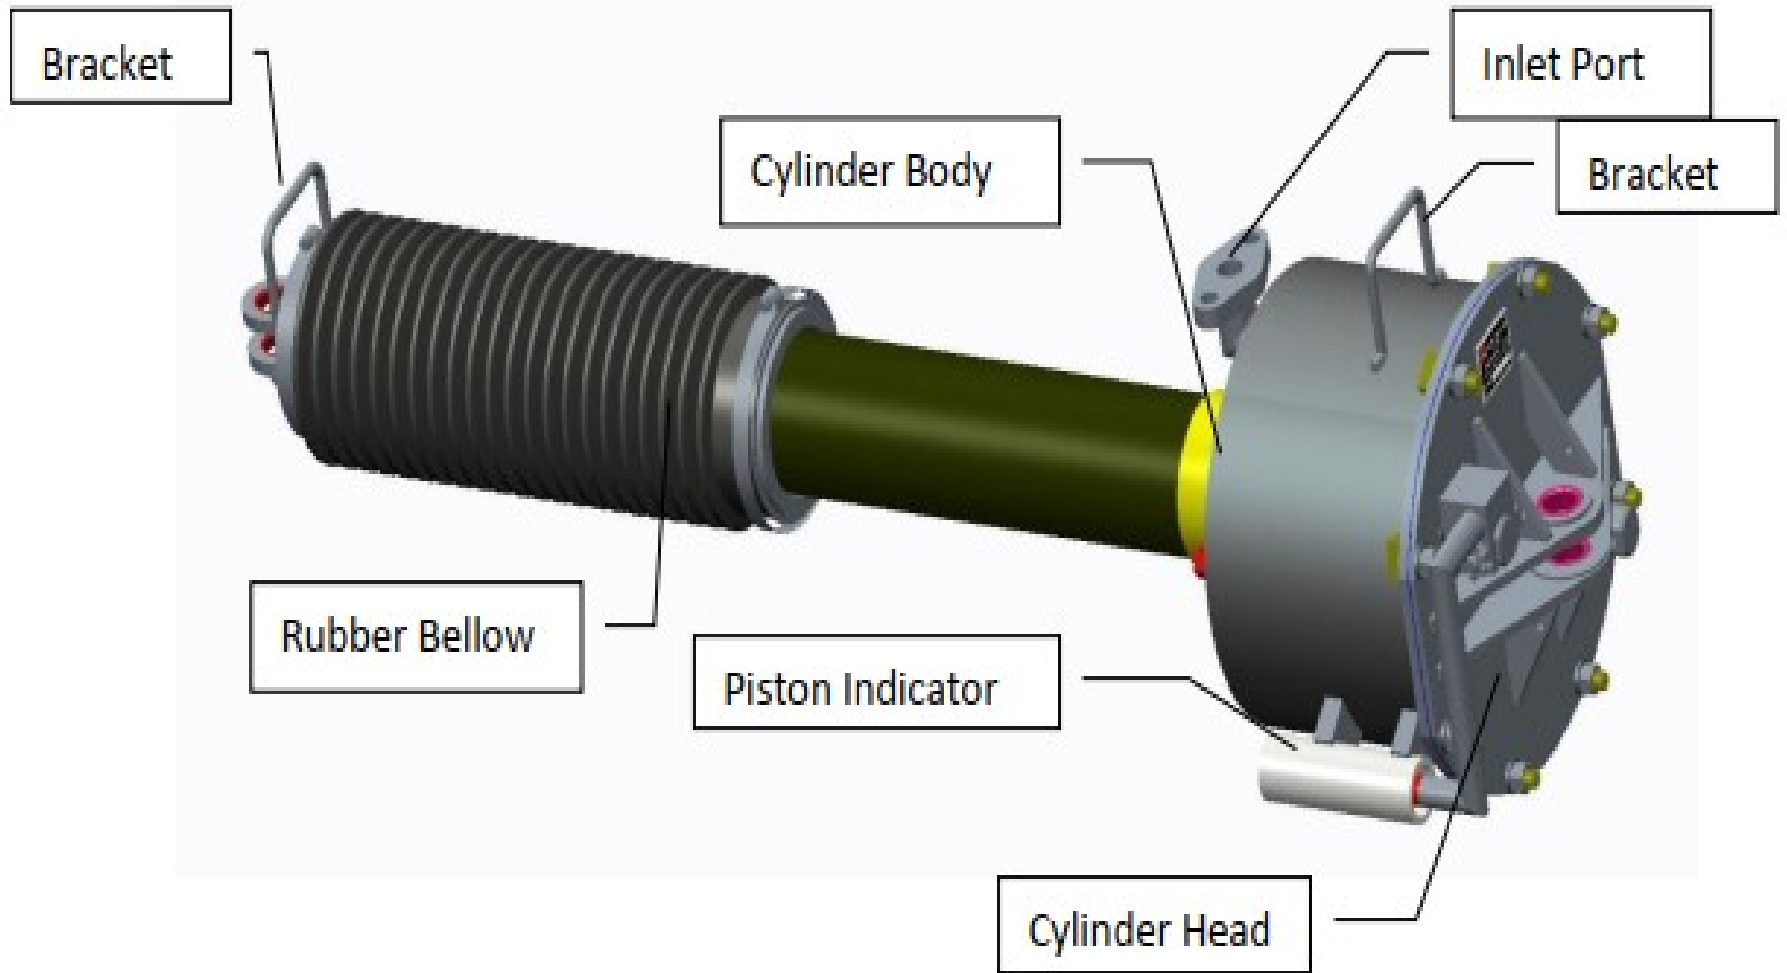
Brake Cylinder – 11 Inch without hand brake arrangement (Drg. No.3EB7347 Alt. Latest)
